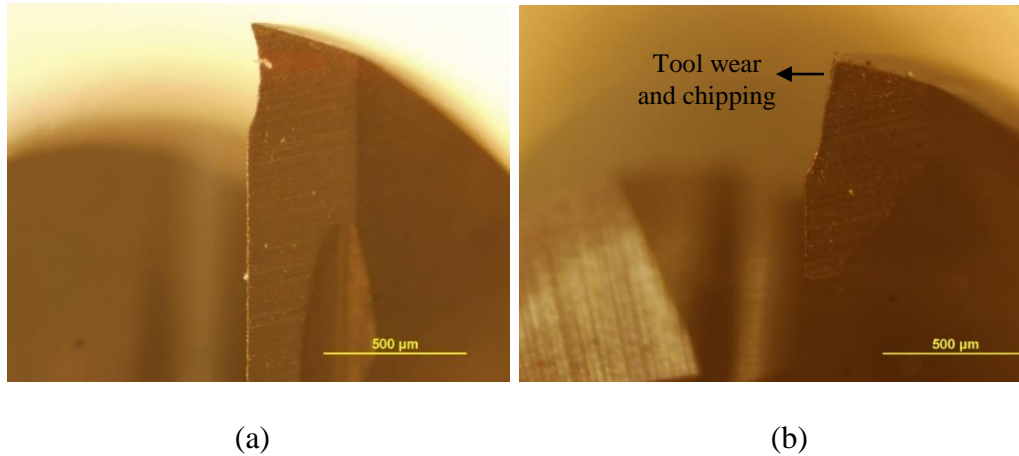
(a) TiAlN coated WC tool before machining (b) Tool chipping and wear observed on TiAlN coated WC tool. Machining 4 consecutive slots, 32 mm length, 15 m/min and 80 m/min speed, 15 $\mu\text{m}/\text{tooth}$ chip load, dry and MQL, 50 μm and 100 μm depth, A36 carbon steel.
